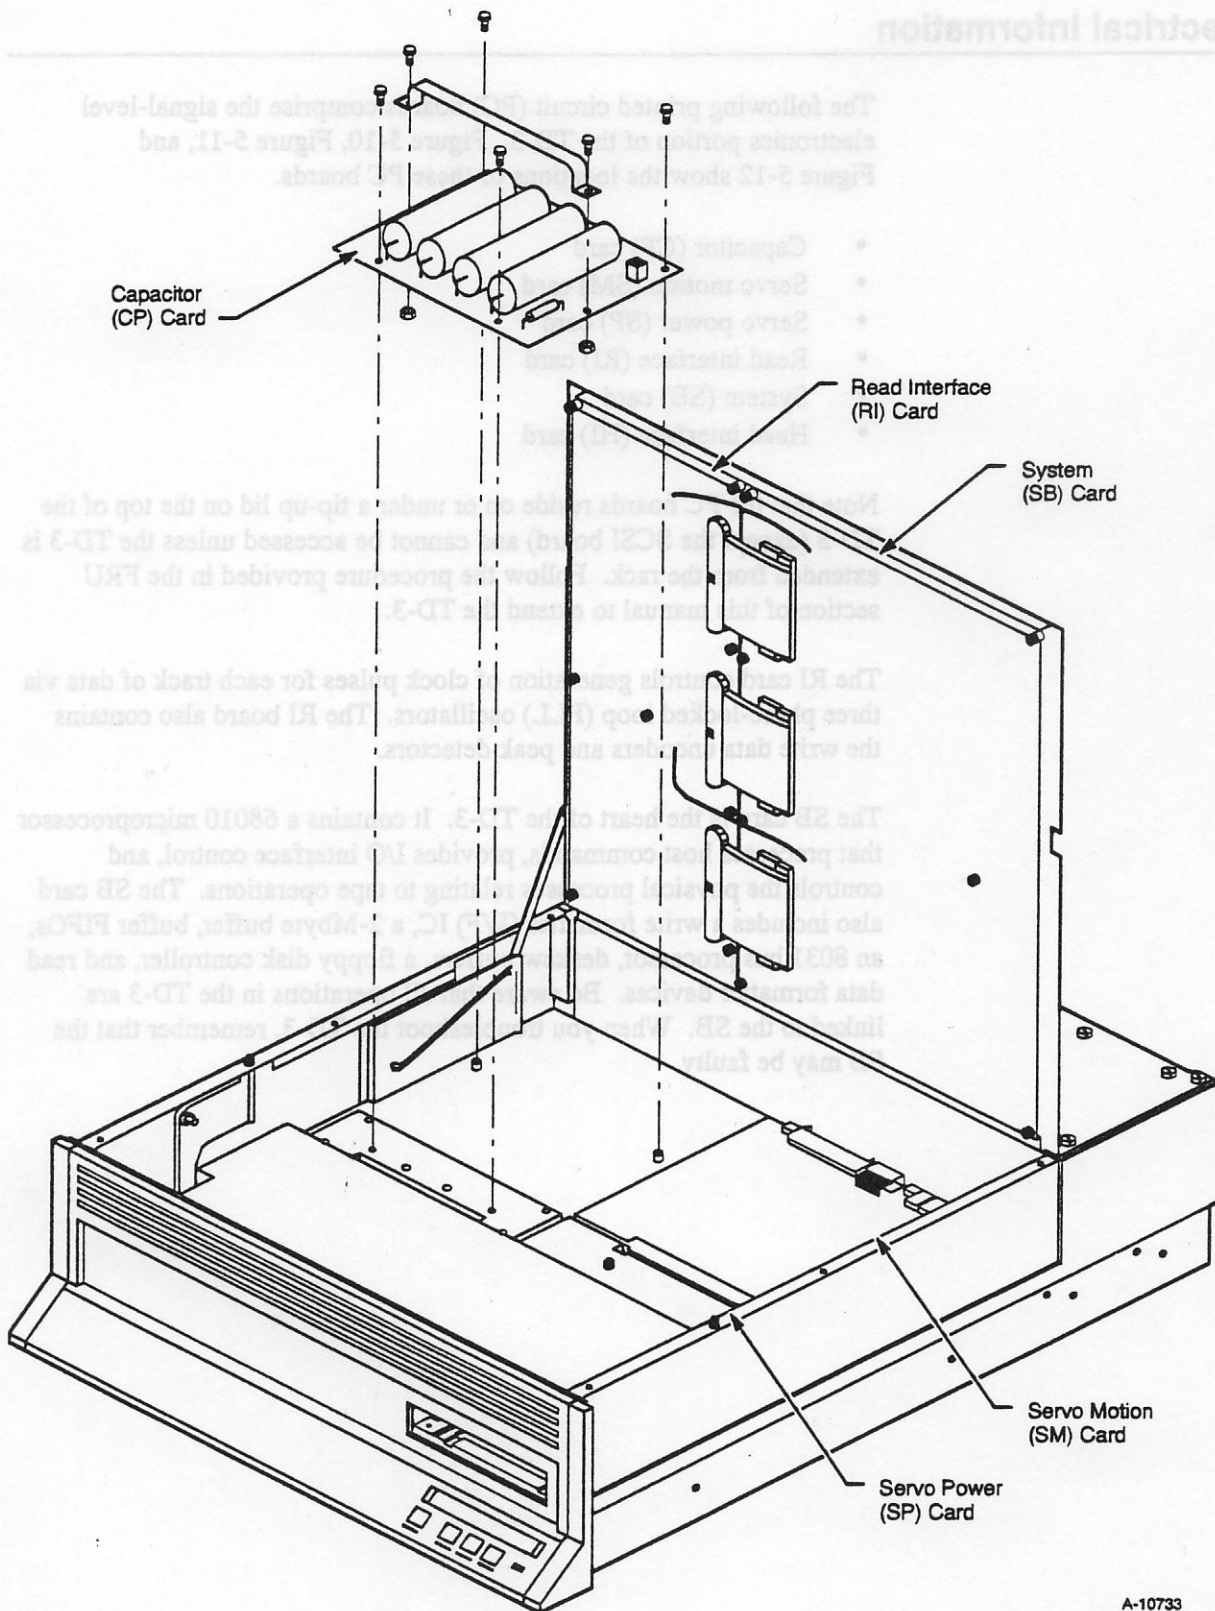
TD-3 Tape Drive Controller Module FRUs (Front View)
